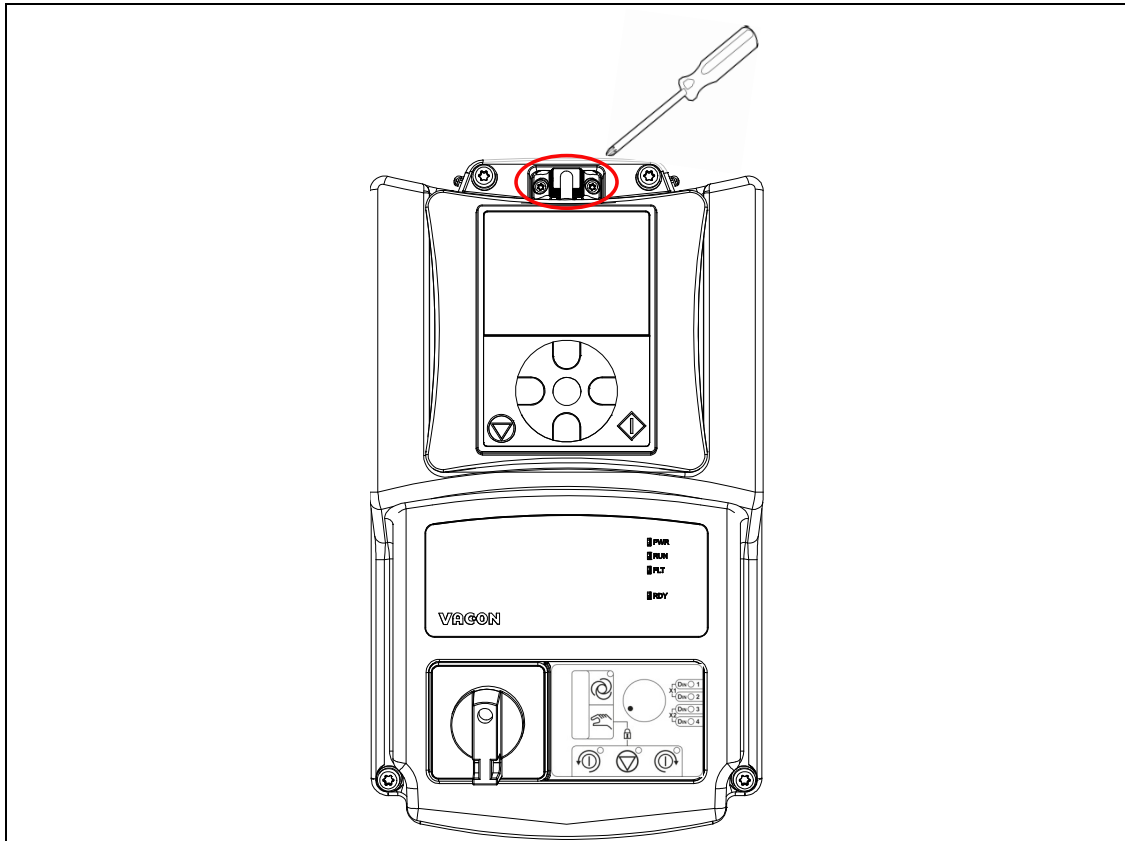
Tighten (max tighten torque 0.5 Nm) the two screws of the keypad cable to the enclosure of the drive. Keypad mounted onto the drive.
